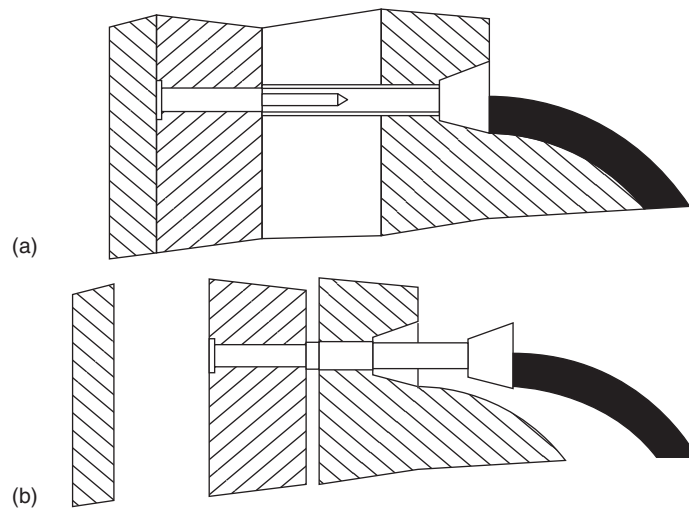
Assembly of stripper plate with tolerance.
